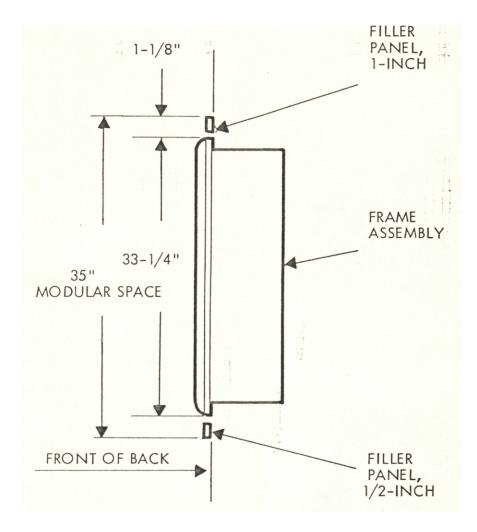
SIDE VIEW OF CP-100 READY FOR INSTALLATION IN RACK
